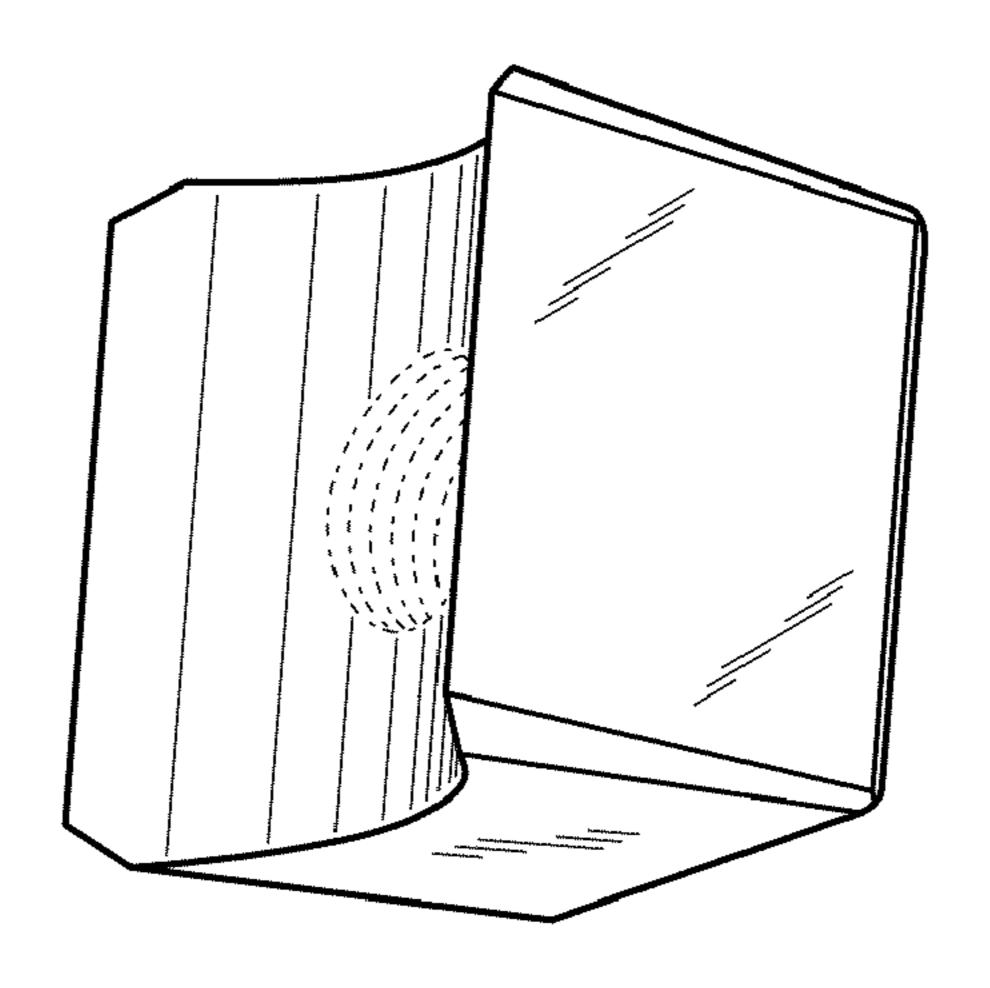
is left side view of the tooth for a circular saw or a mower drum of FIG. 21, the right side view being an identical view thereof;
